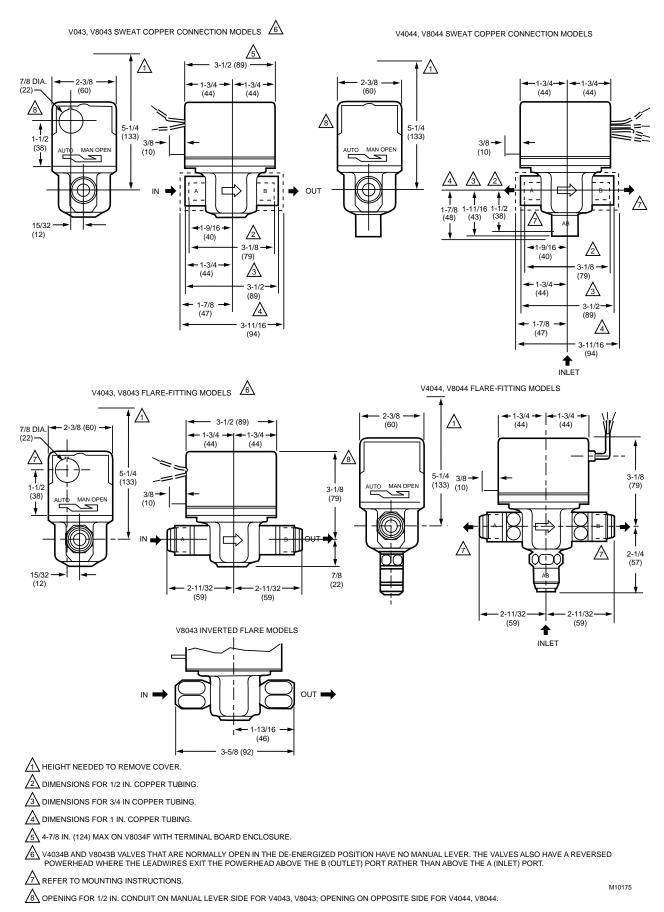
Mounting dimensions in in. (mm) of V4043/44, V8043/44 Motorized Valves.
